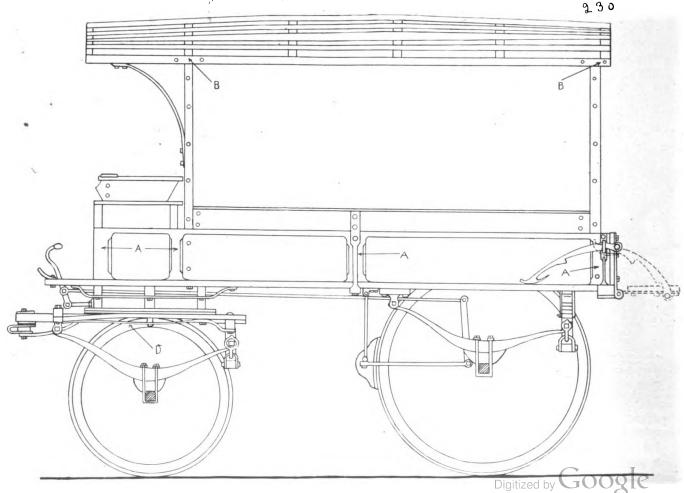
THE SIDE ELEVATION SHOWS THE PRINCIPAL LINES AS WELL AS THE GENERAL DETAILS
